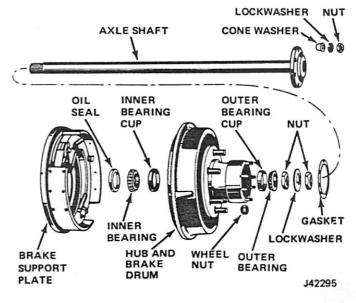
H-10 Model 60 Rear Axle Hub and Bearings
